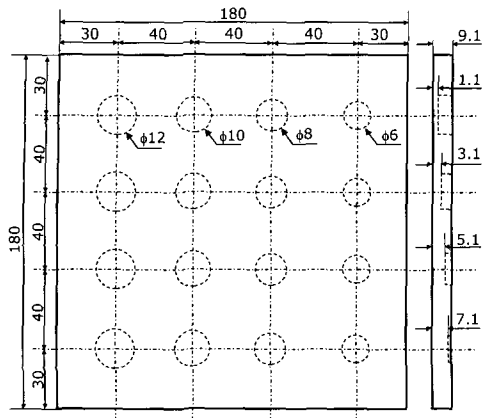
Artificial specimen with back-drilled-bottom-plate defects (unit: mm)
